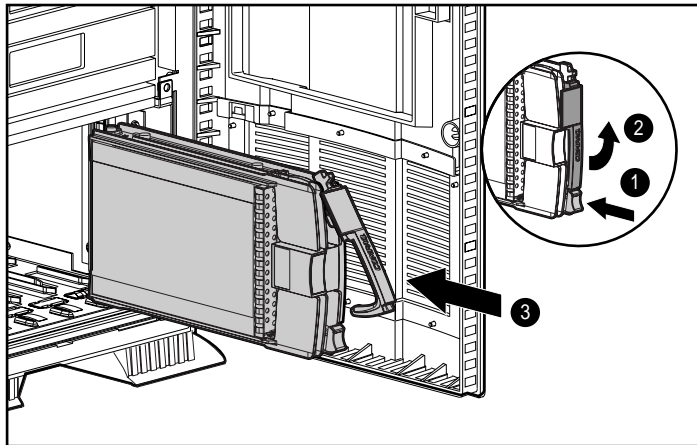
Opening ejector levers and inserting the hard drive into the drive cage
